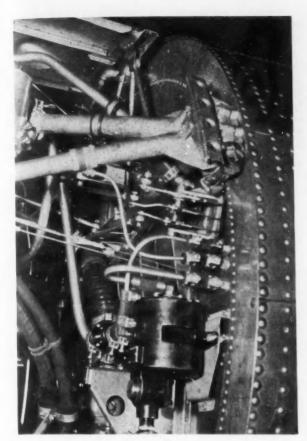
View of inboard side of right engine nacelle showing oil separator unit, incorporating a pressure relief valve, mounted to the firewall
